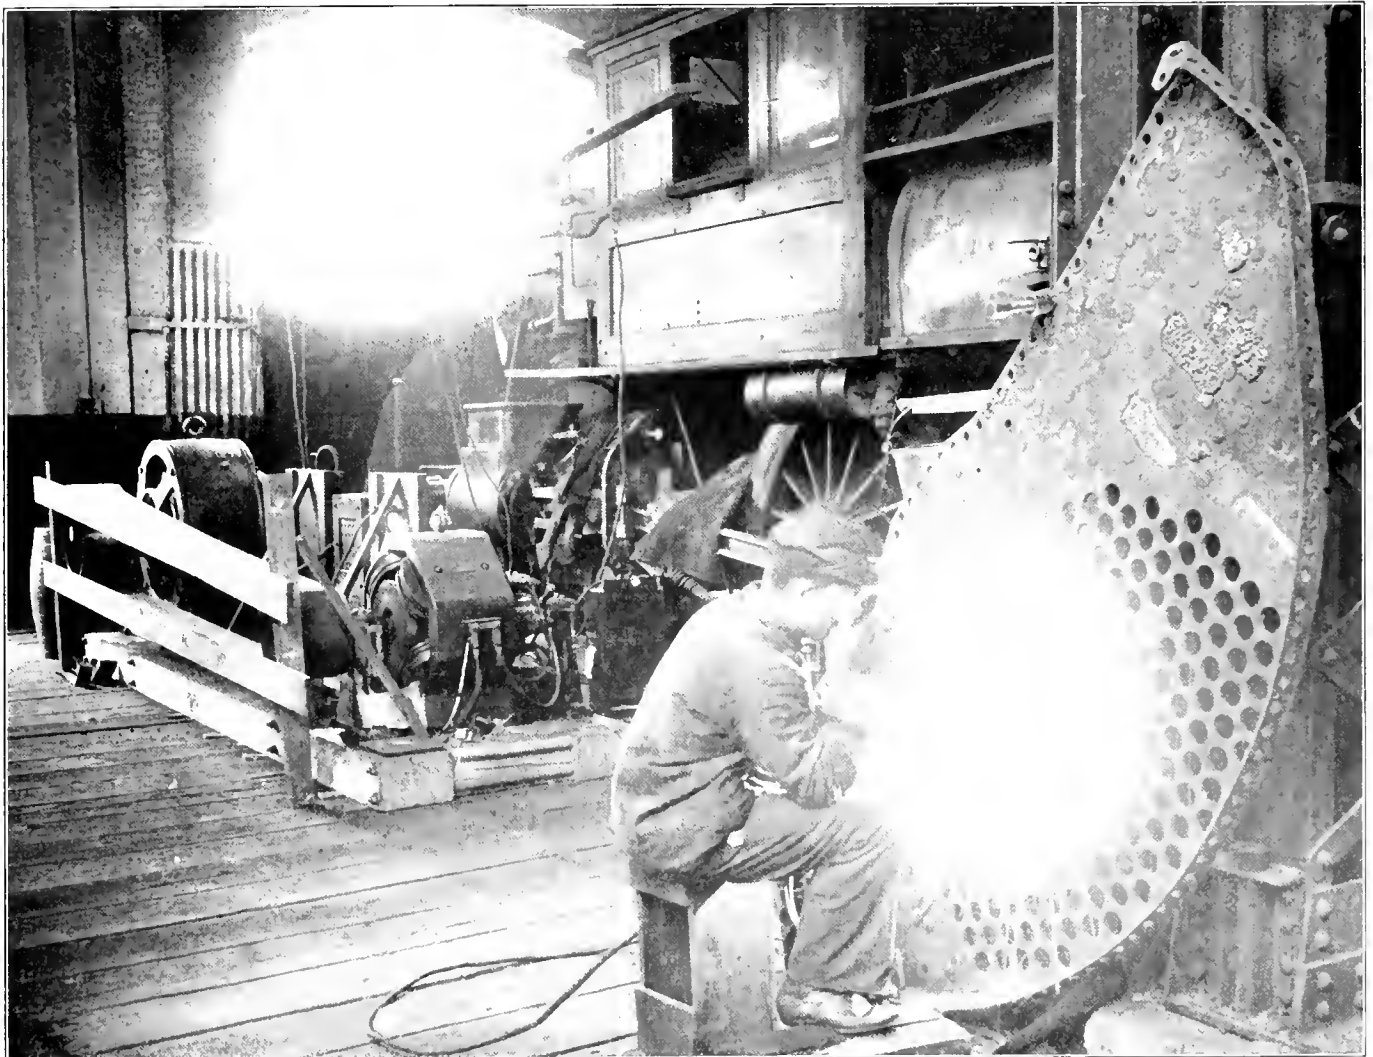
Electric Welder at Work; Electrical Machinery in the Rear Is a Temporary Installation.
